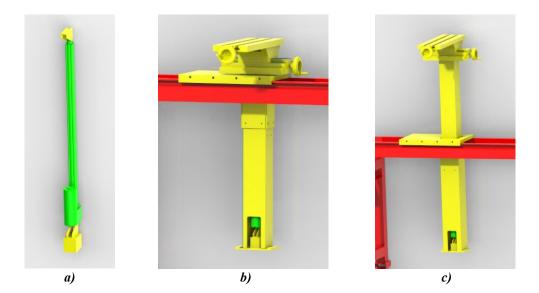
a) Lifting actuator b) Zero stroke length position c) Full stroke length position
